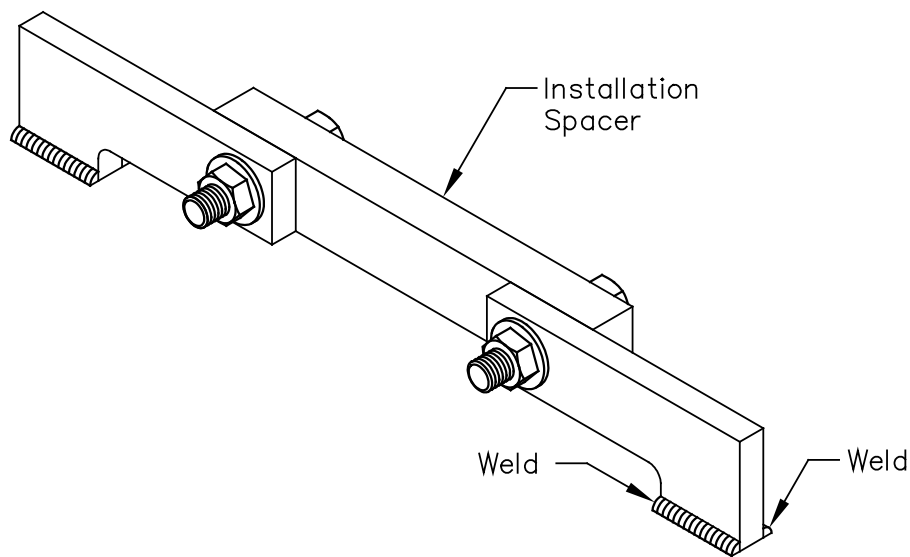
D – Welding Transducer Mounting Bracket / Installation Spacer
